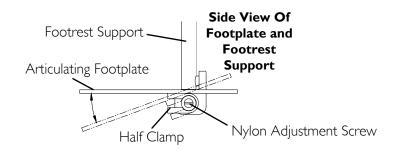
Adjusting Flip-Up Footplate Angle
